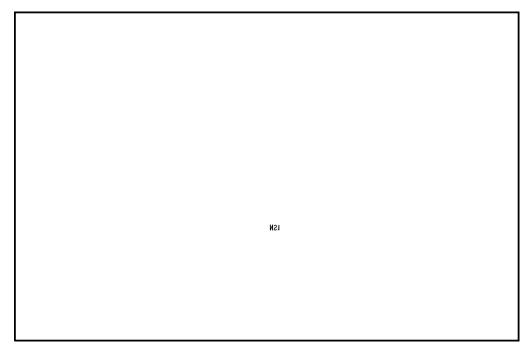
UCD3138064EVM-166 Bottom Assembly Drawing (no components on this side)
